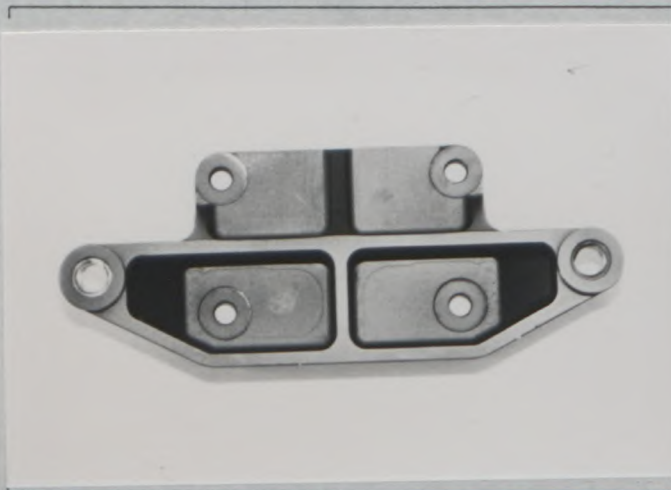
ALTERNATIVE REAR BRAKE CALIPER POSITION
